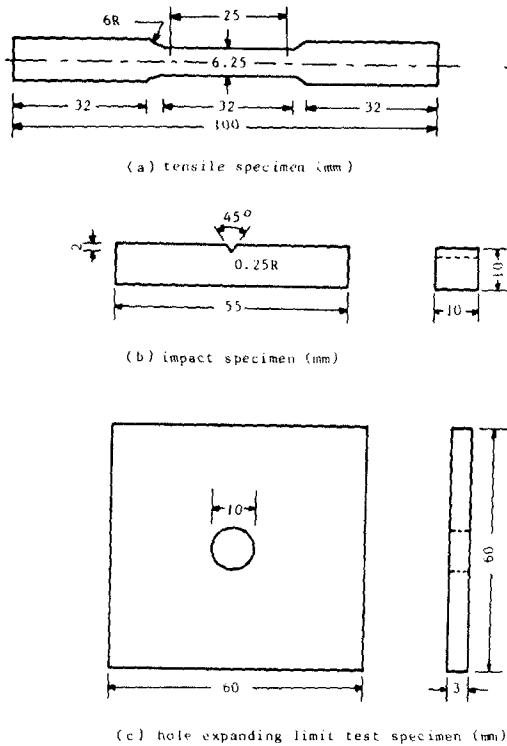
Schematic diagrams of (a) tensile, (b) impact and (c) hole expanding limit(λ) test specimens.
